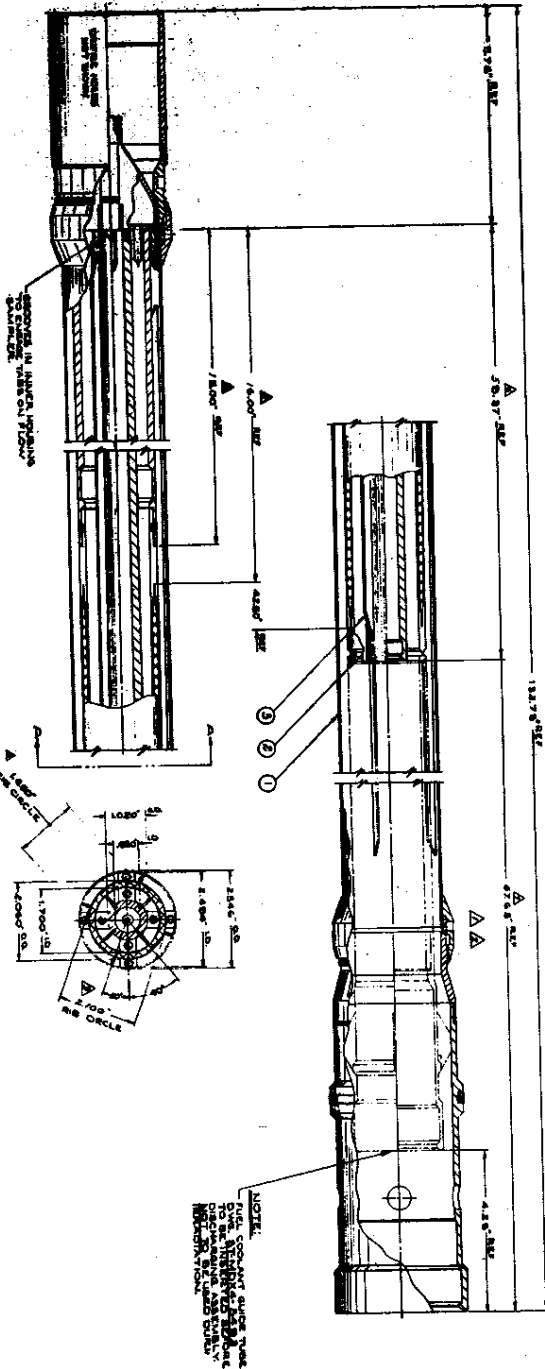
3 EMT FUEL ASSEMBLY (ZIRCALOY HOUSING)
